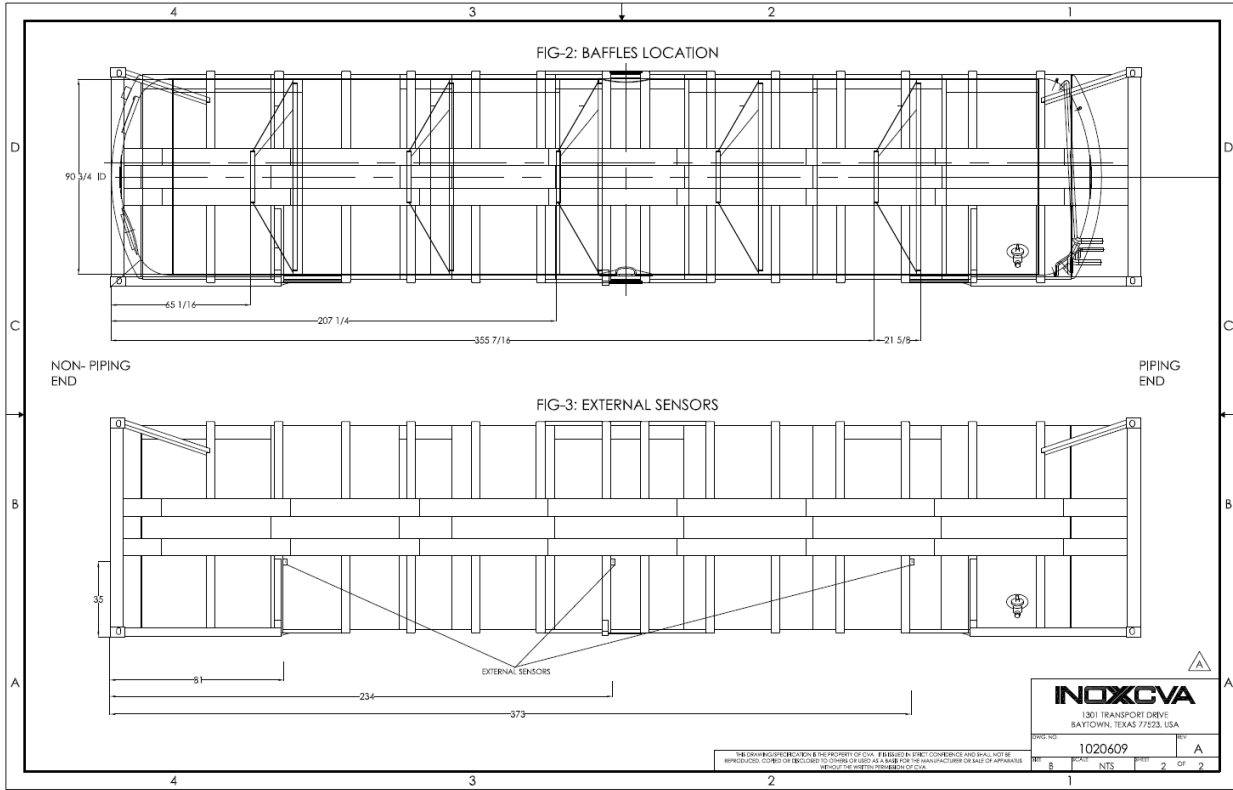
ISO Tank Showing Location of Baffles in Plain View and External Weld-Pad Thermocouples in Elevation View (provided by CVA)
